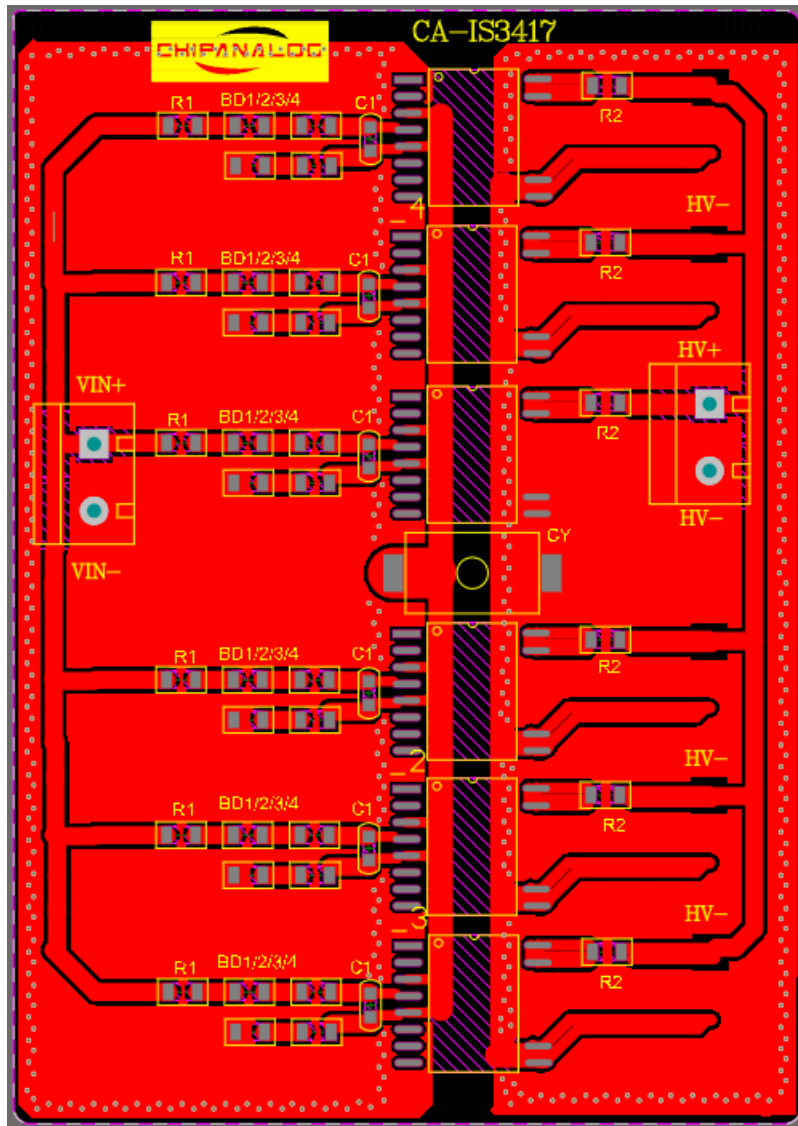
CA-IS3417WT Reference design PCB top layer
